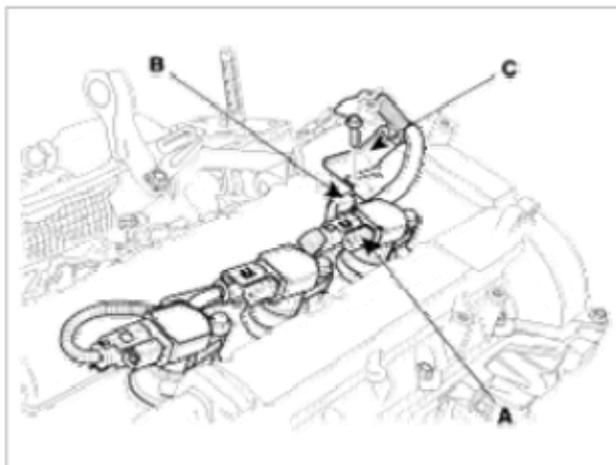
Locating RH Ignition Coil Connector, Condenser Connector And Wiring Bracket
